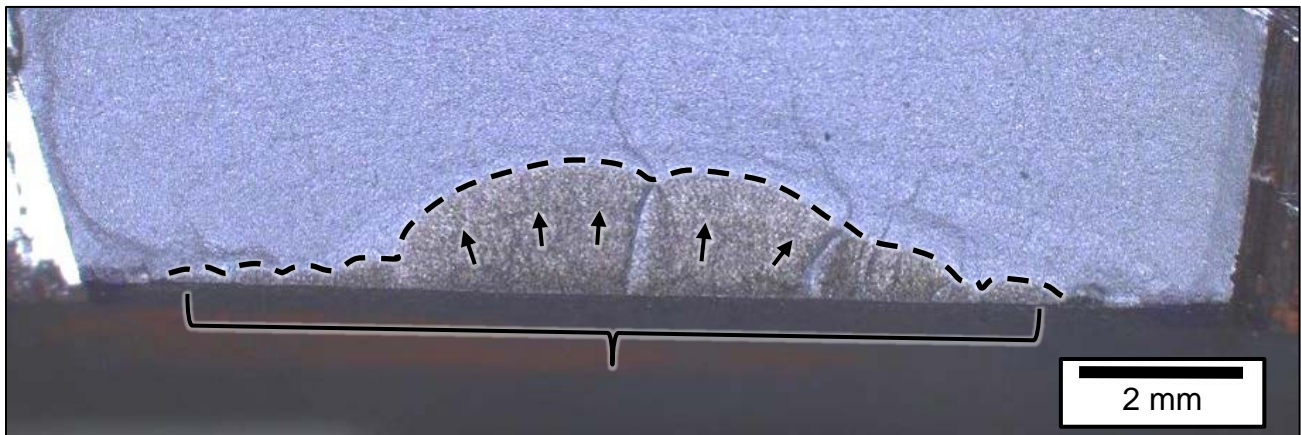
Overall view of the crack fracture surface of blade P after opening by lab fracture. Dashed lines indicate the crack boundary. Unlabeled brackets and arrows indicate the location of fatigue origins and crack arrest lines, respectively. Photo courtesy of Safran Aircraft Engines.
